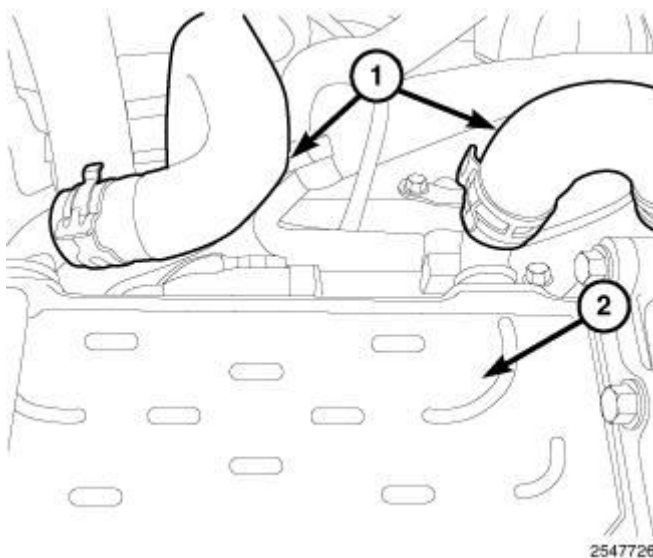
Identifying Coolant Hoses & EGR Cooler
